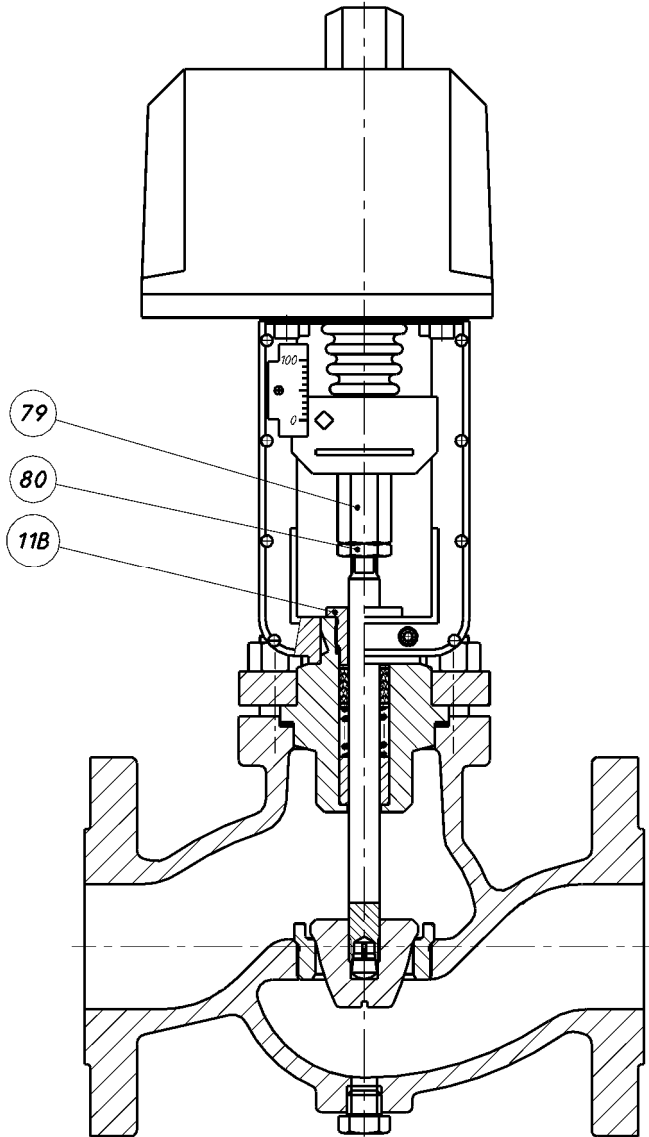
Control valve with HONEYWELL electric actuator - ZH type
